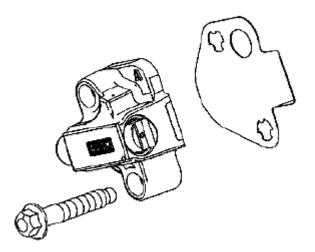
Identifying Right Secondary Camshaft Drive Chain Tensioner And Bolts
